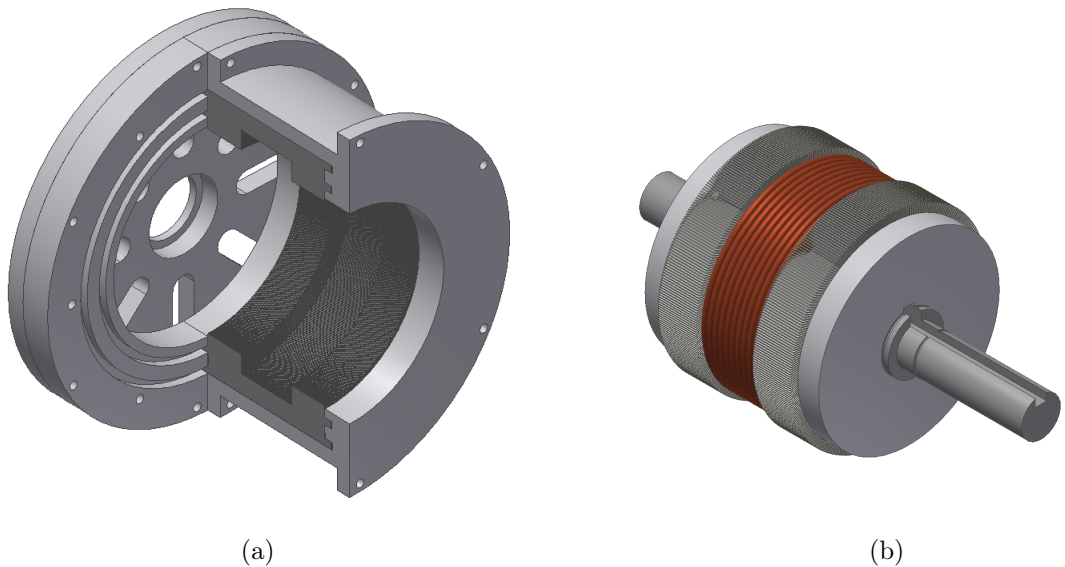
(a) The primary side assembly, and (b) the secondary side RT assembly
